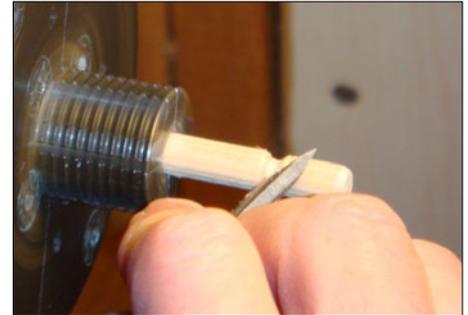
Using a skew chisel to cut a special peg to polish the inside of a tapered hole.
